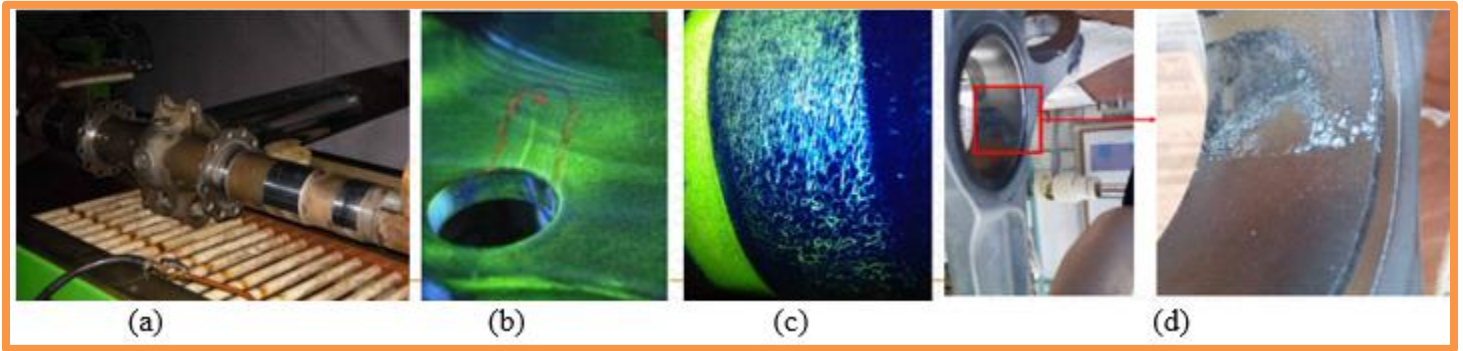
Boeing 737-800 aircraft landing gear (a), cracks detected by FPI (b), “chicken-wire” discontinuities detected by FPI (c), and pitting corrosion in landing gear housing (d)
